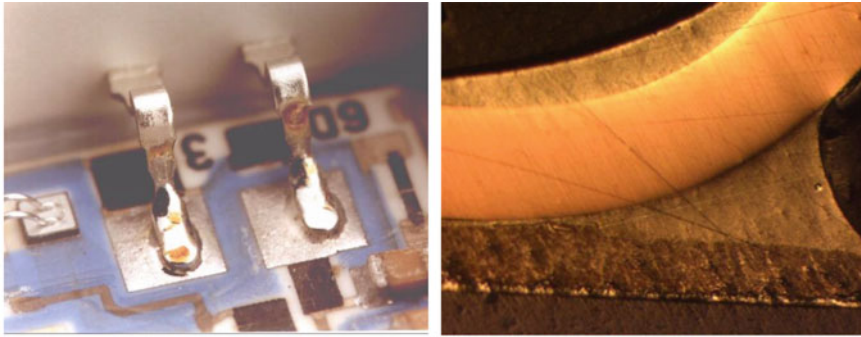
Detailed view of two solder joints (left), cross section of a laser-soldered joint (right)
